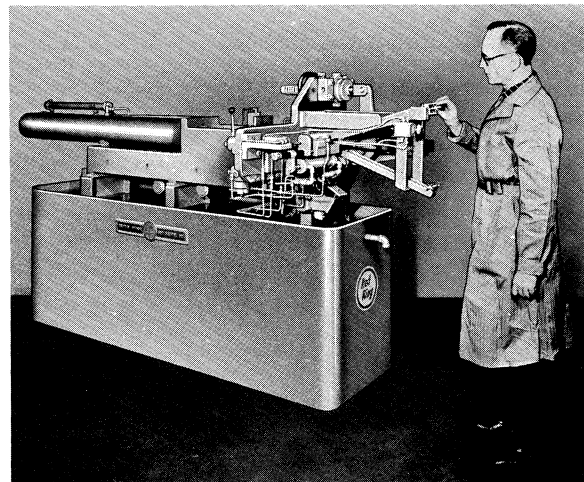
A Red Ring fully-automated air-powered broaching fixture that broaches flats on the ends of motor shafts at a rate of 720 pieces per hour.
